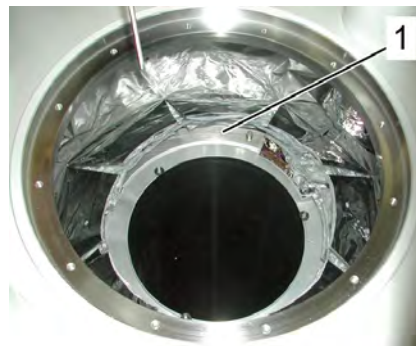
Disassembling the Nitrogen Tube - step 1
